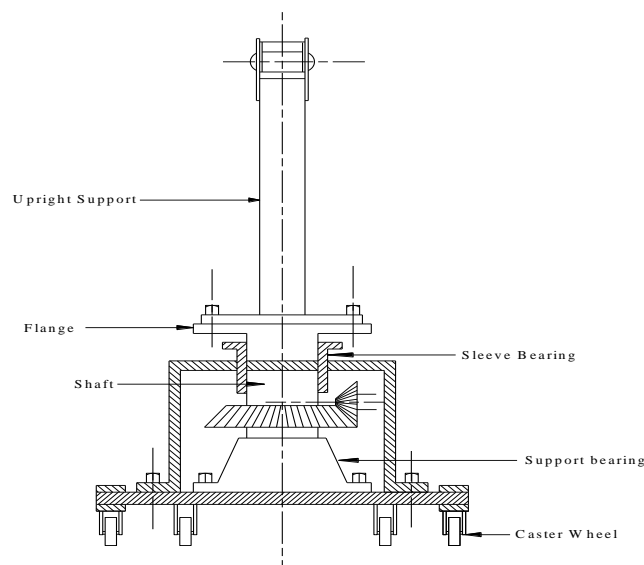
Front View of the Rotating Mechanism of the Proposed Design
